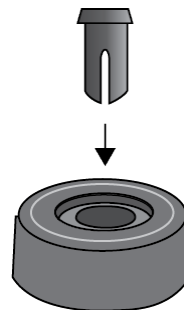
Inserting the Rivet Housing into the Bumper Foot
